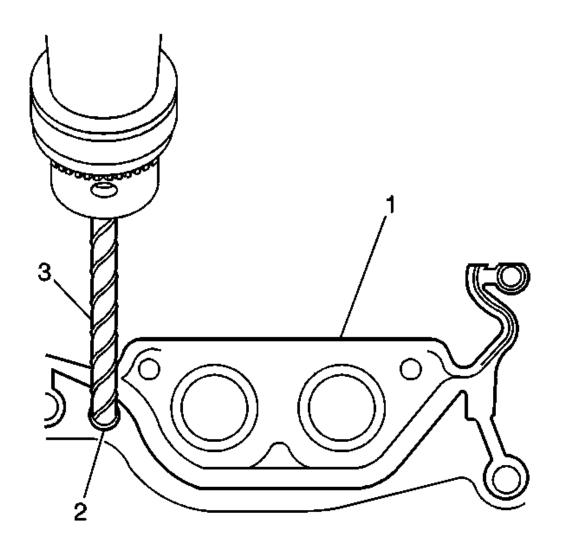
Drilling Oil Pan Gasket Retaining Rivets Courtesy of GENERAL MOTORS CORP.
